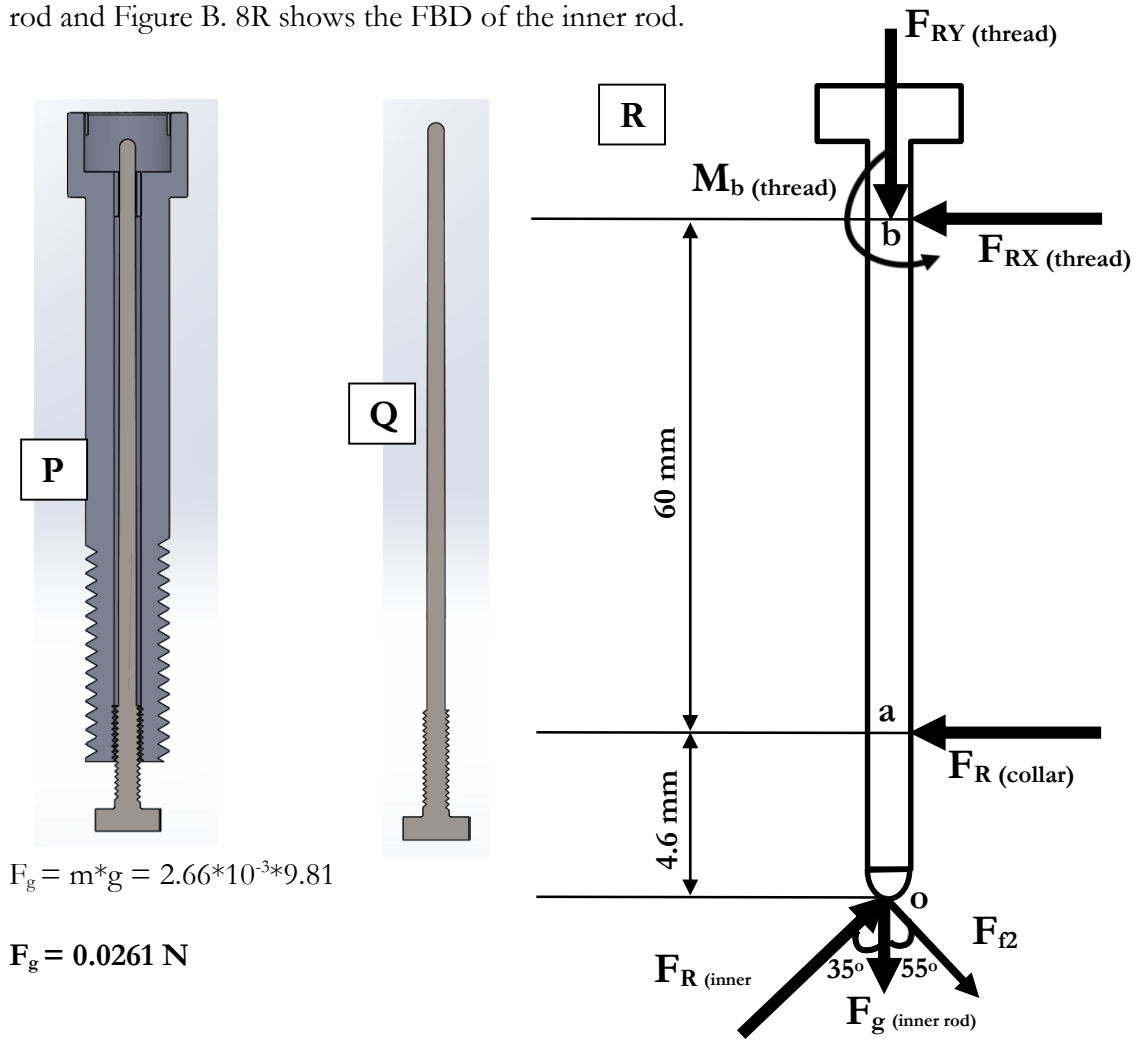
P) Screw and inner rod assembly view, Q) Inner rod view and R) Free body diagram of inner rod
